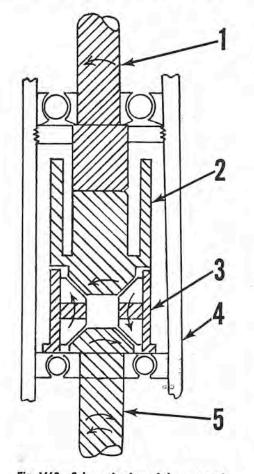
Schematic view of the automatic transmission used on all models, Refer to text for complete description of method of operation.
